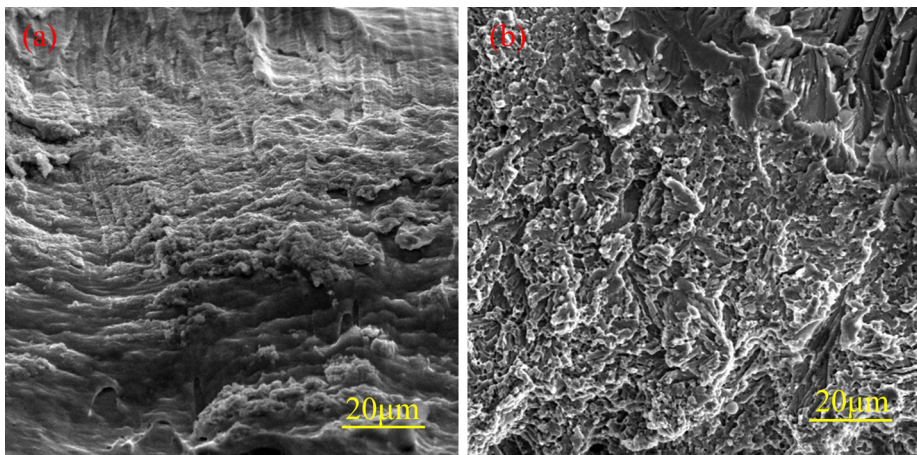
The interfacial fracture morphology of the Ti/Al/Ti welded joint (a) 1200 W (b) 140 W.
